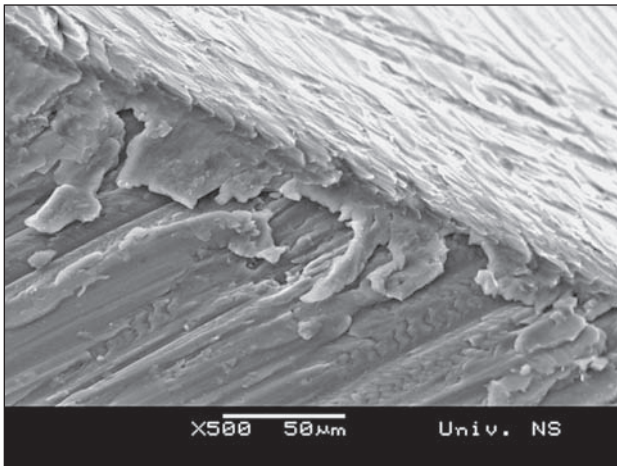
Built up edge on the chip root (conventionally cast specimen)
